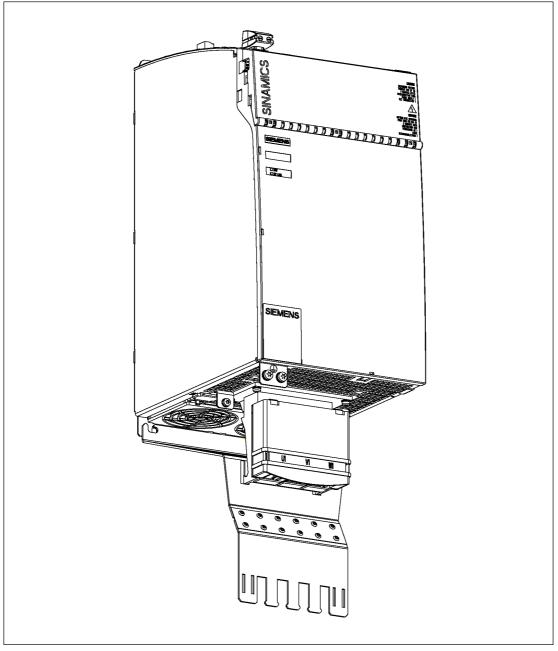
Shielded terminal plate for a 200 mm module with internal air cooling
